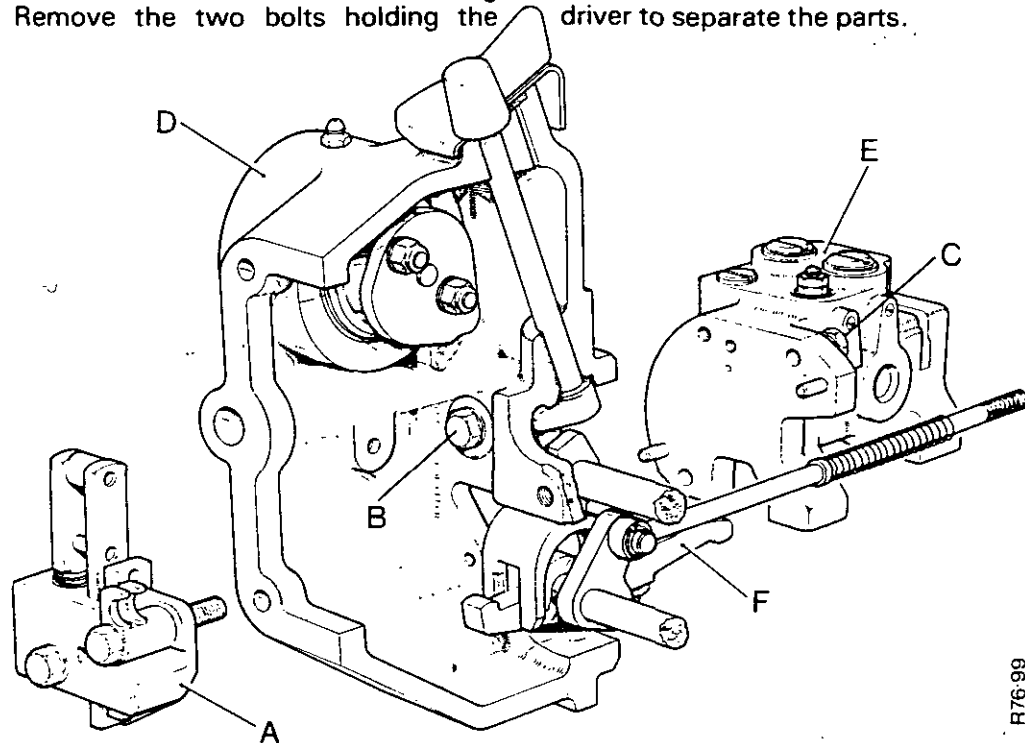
REMOVAL OF THE SELECTAMATIC VALVE
